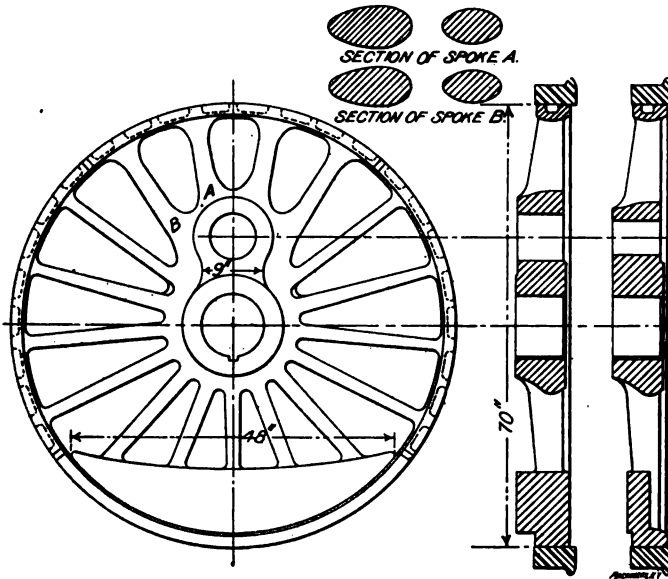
Cast Steel Driving Wheel Center for Atlantic Type Locomotive
